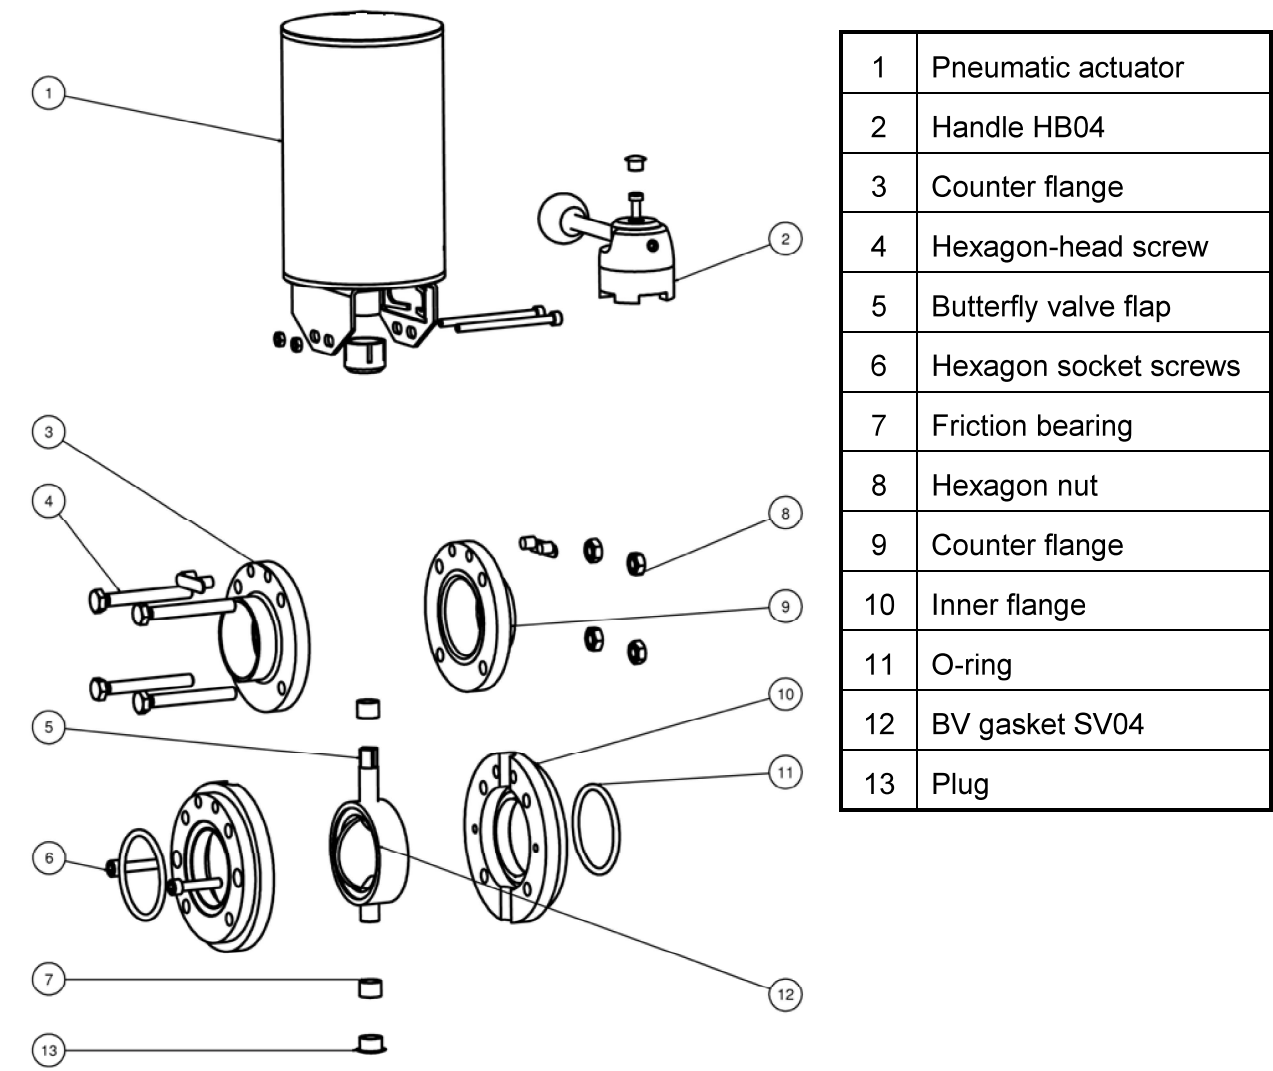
Disassembly butterfly valve SV04 BF with HB04 or PAMS
